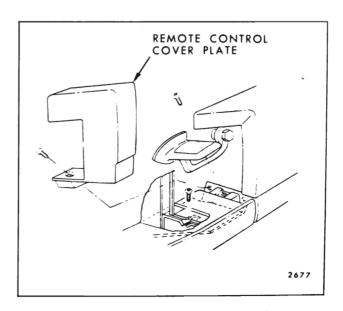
Arm Rest to Hanger Plate Attachments
